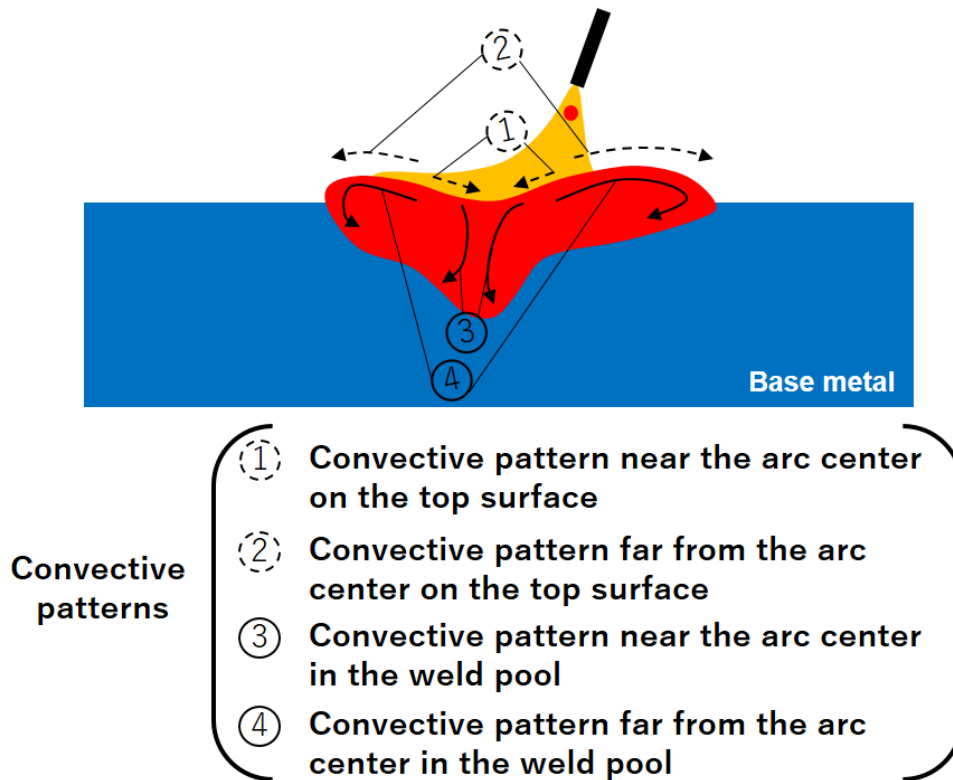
The convective patterns in the GMAW weld pool
